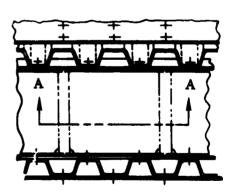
TYPICAL SPAR-PANEL STRUCTURE-HOT MONOCOQUE CONSTRUCTION
